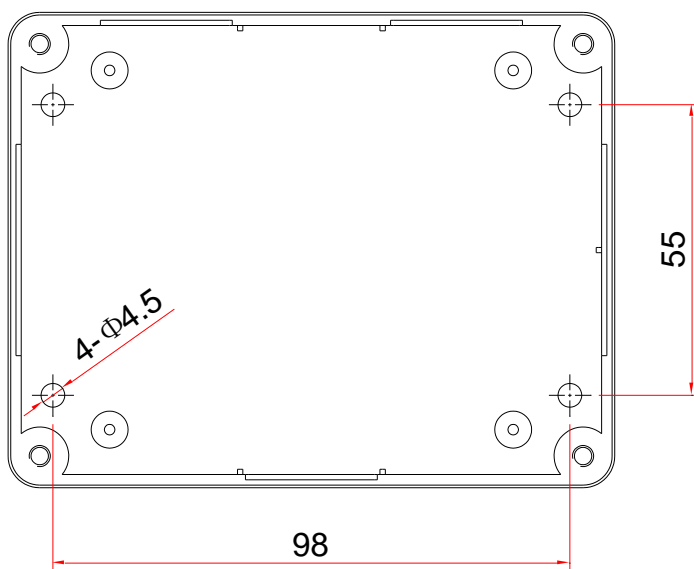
16 Installation dimension diagram (mounting hole inside the box)
